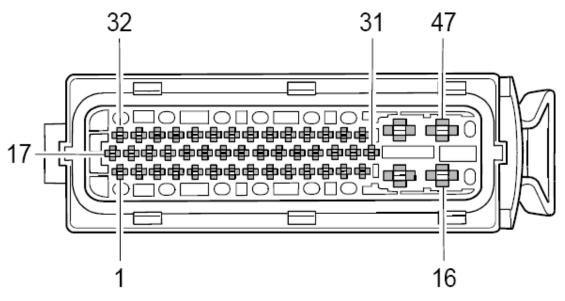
Identifying Transfer Box Control Unit Plug Connector 47-Pins Courtesy of PORSCHE OF NORTH AMERICA, INC.
